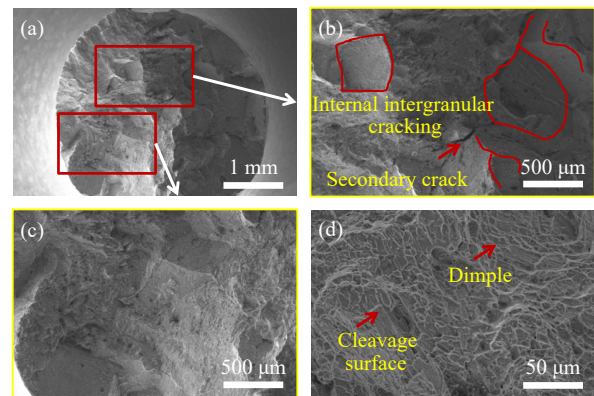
Tensile fracture morphologies of the 970°C specimen: (a) overall morphology of the cross-section; (b) internal intergranular cracking; (c) intergranular cracking at the edge; (d) cleavage and dimple feature.
